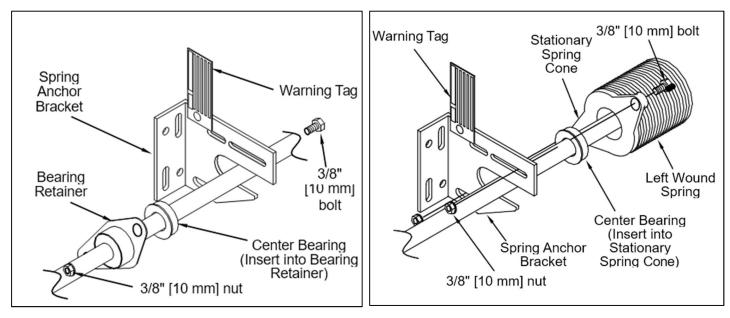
SPRING ANCHOR BEARING ASSEMBLY
